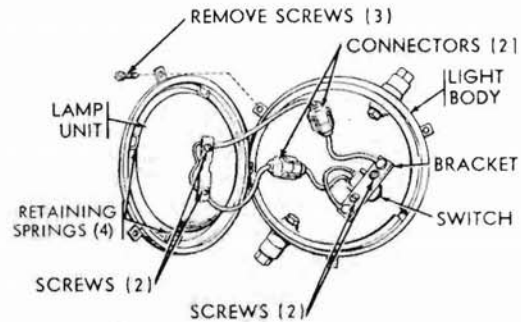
Crane floodlight - disassembled showing lamp and toggle switch
